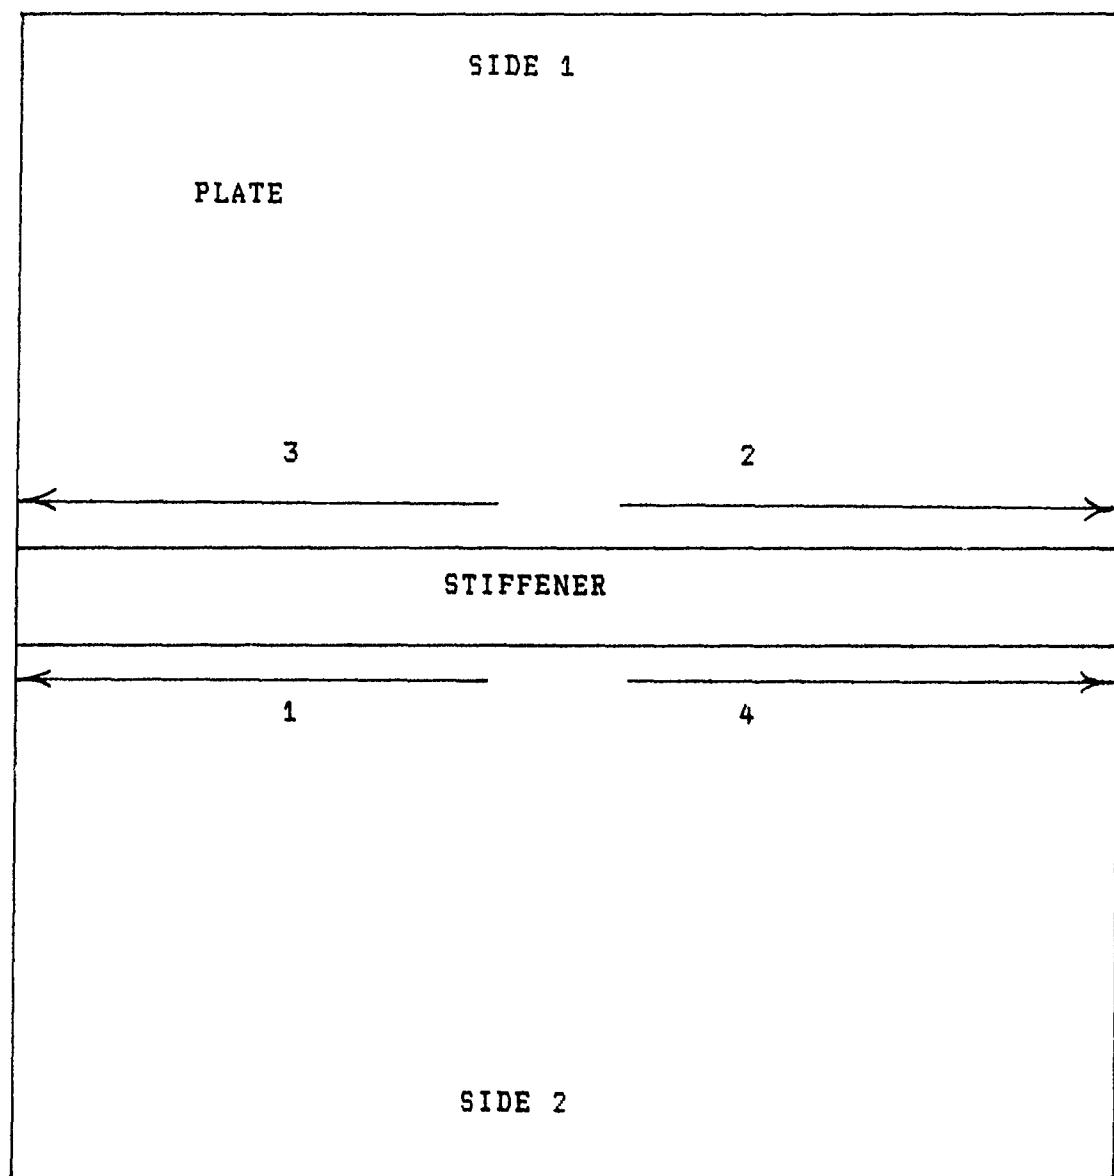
WELDING SEQUENCE FOR 1/8" THICK FREE-END SAMPLES
